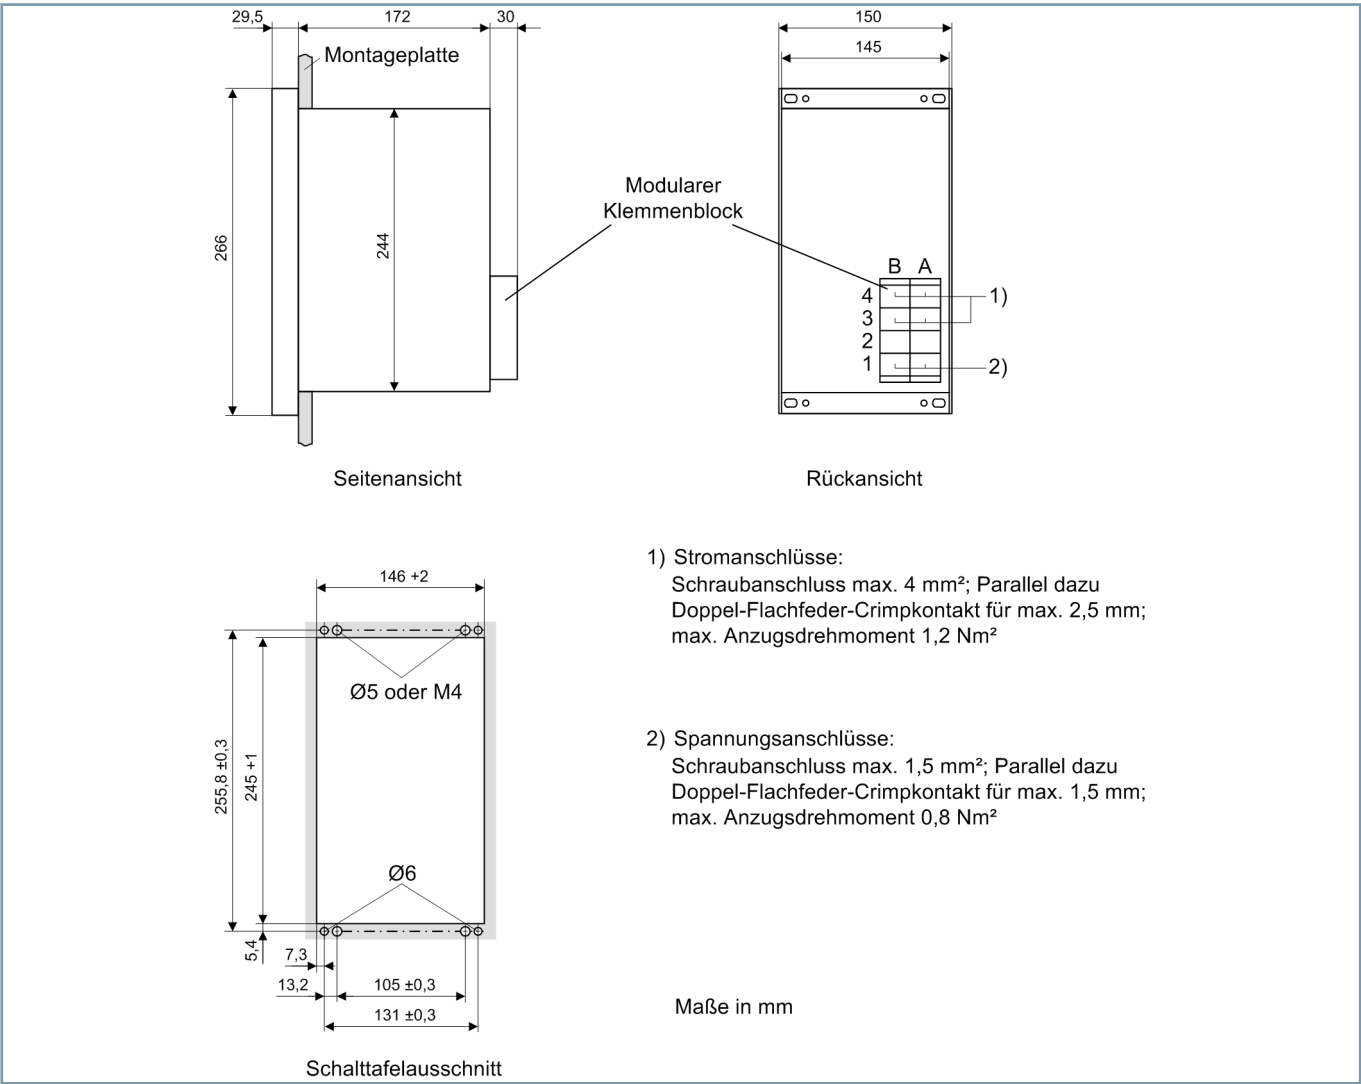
/4 Dimensional Drawing Coupling Unit 7XR6100-OCA0 in Panel Flush Mounting Housing
